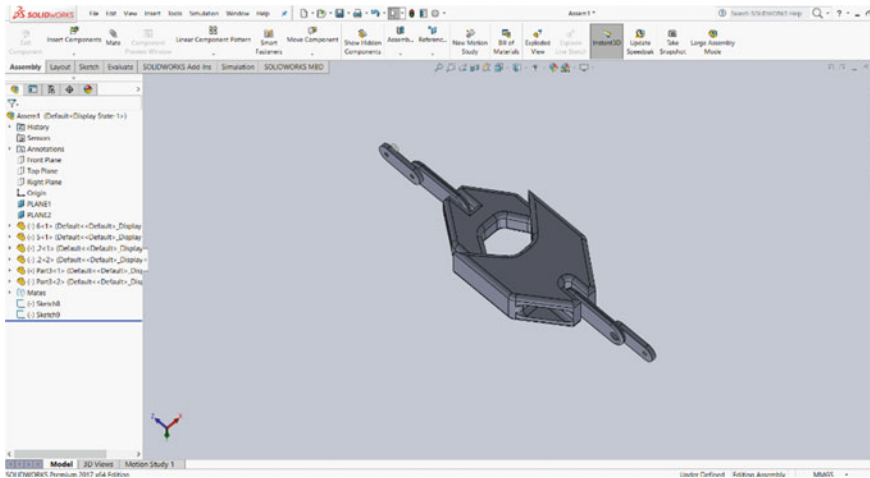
Final assembly of the locking mechanism developed in CAD environment
